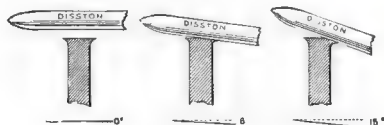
Turning the edge of a Cabinet Scraper, using 4½-inch Oval burnisher No. 1.
